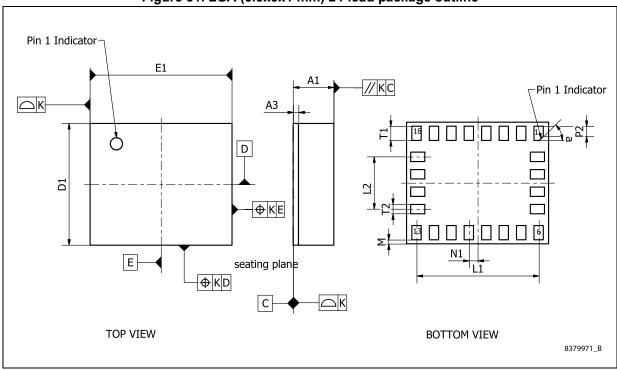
LGA (3.5x3x1 mm) 24-lead package outline
